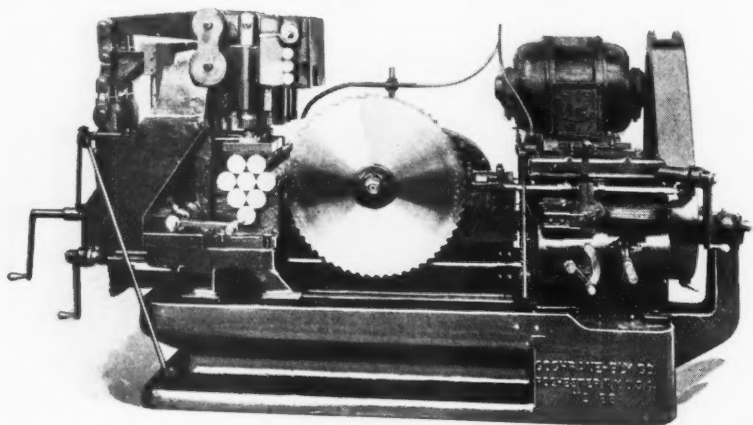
Cutting off Eight 3-inch Round Bars in 2 1/2 Minutes on a Cochrane-Bly Metal-sawing Machine Having Duplex Compound Toggle Air Clamp. Same Equipment Cuts off 559 Rods, 1/4 Inch in Diameter, in 2 1/2 Minutes
